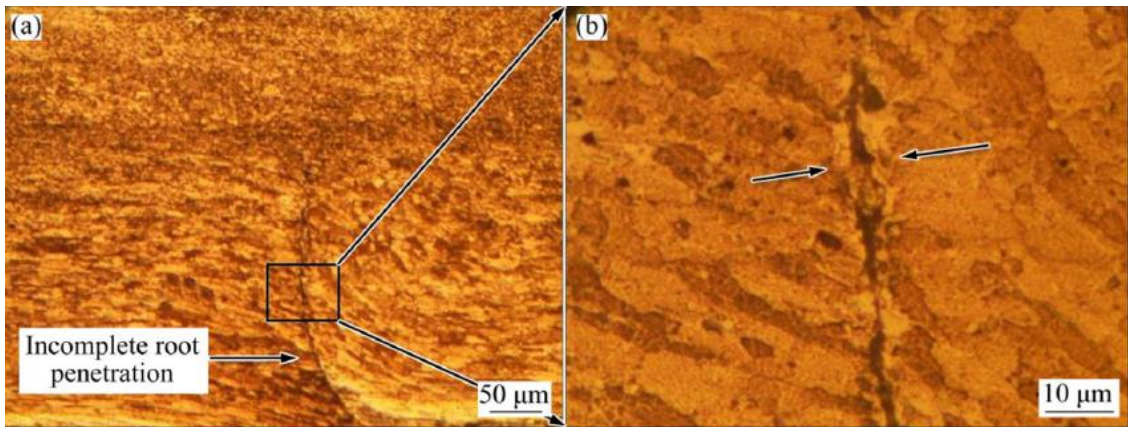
Friction stir weld with incomplete root penetration [29].
